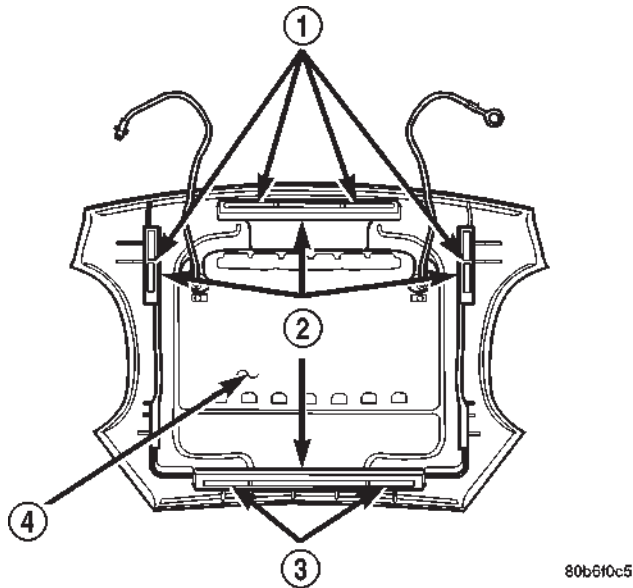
Driver Side Airbag Module Trim Cover and Horn Switch
